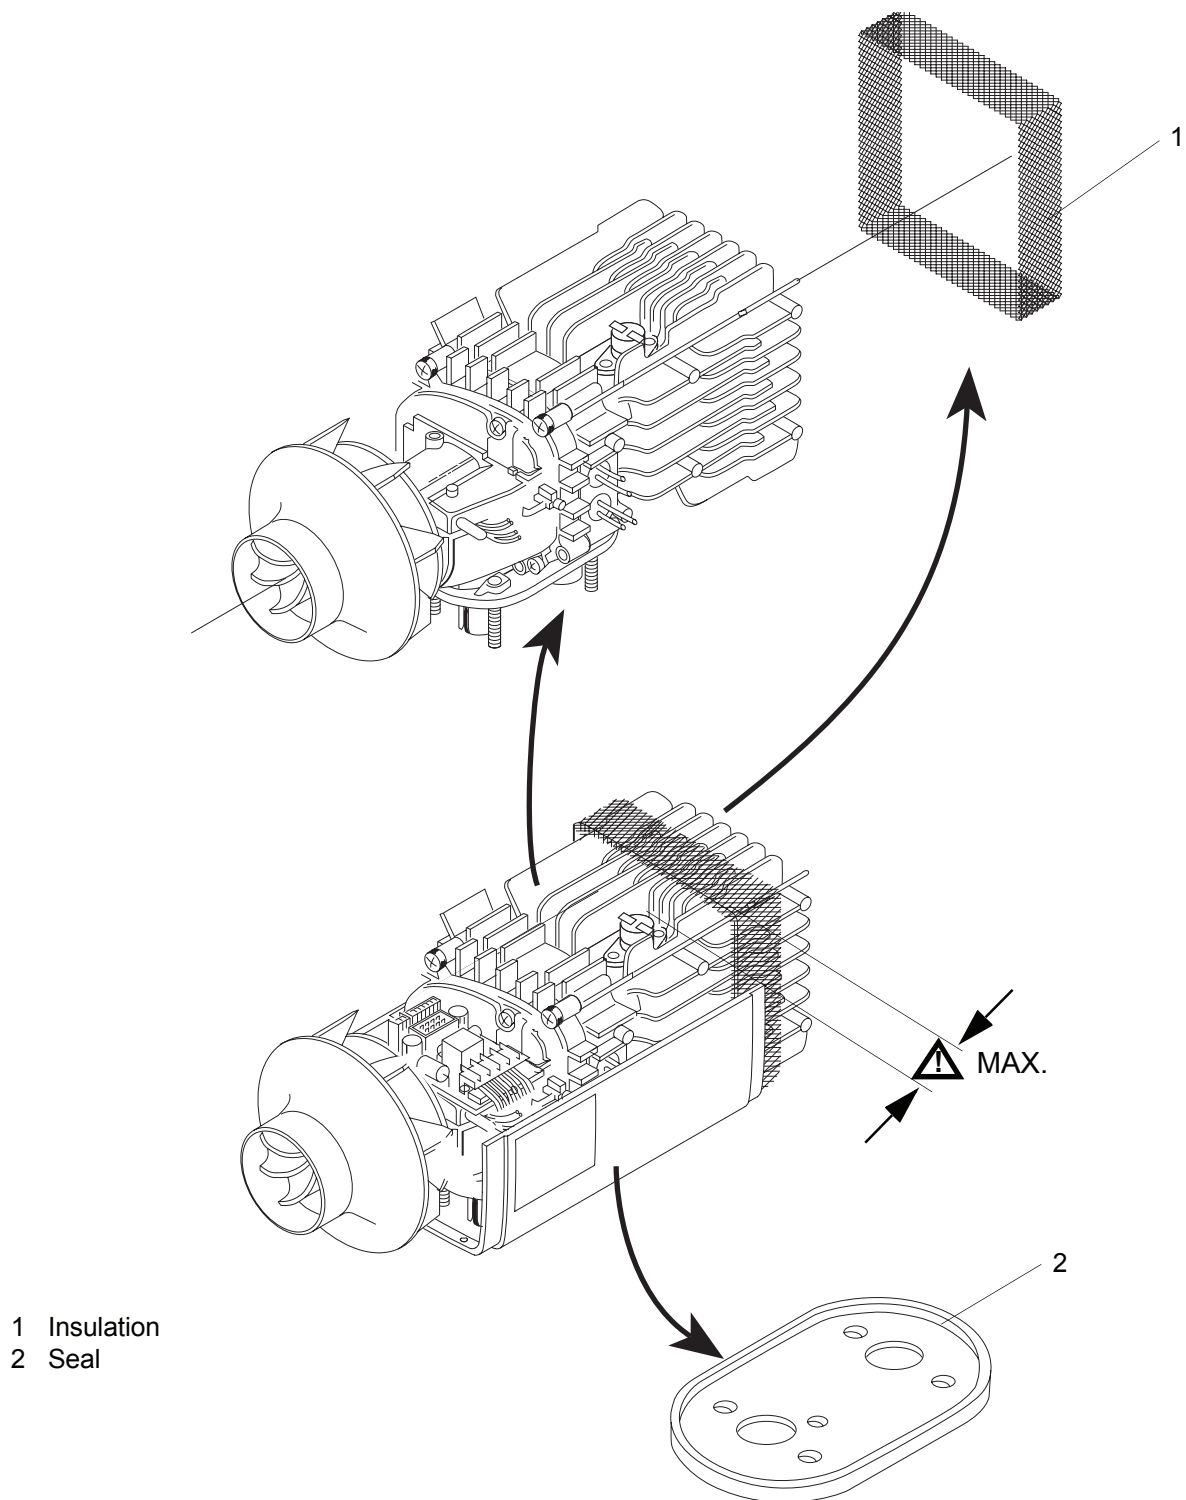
Replacement of Combustion Air Fan (Disassembly)
